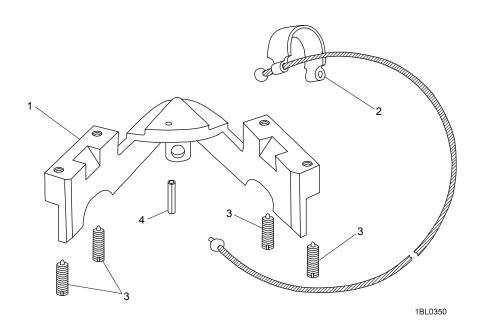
Additional Authorized Equipment, Chamber and Discriminator Assembly, PN 11833460
